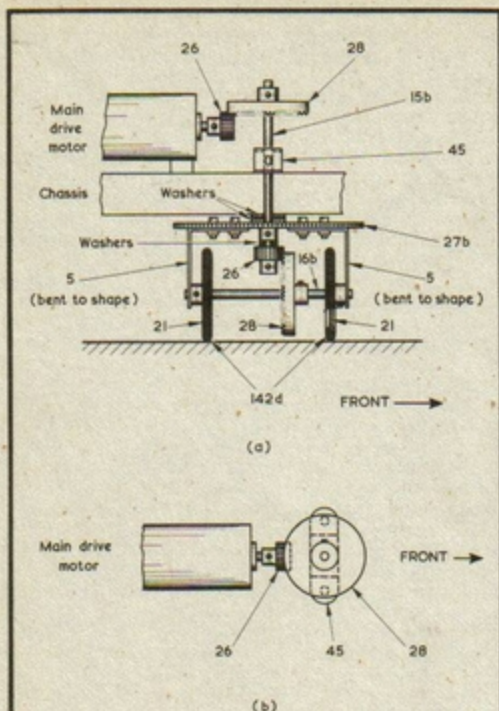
(a). Side view, demonstrating the manner in which power from the main drive motor is applied to the front wheels. To assist in illustrating operation, part of the assembly is shown in section. It is assumed that the wheels are orientated so that their axle is parallel with the long sides of the chassis. The identifying numbers are Meccano part numbers
